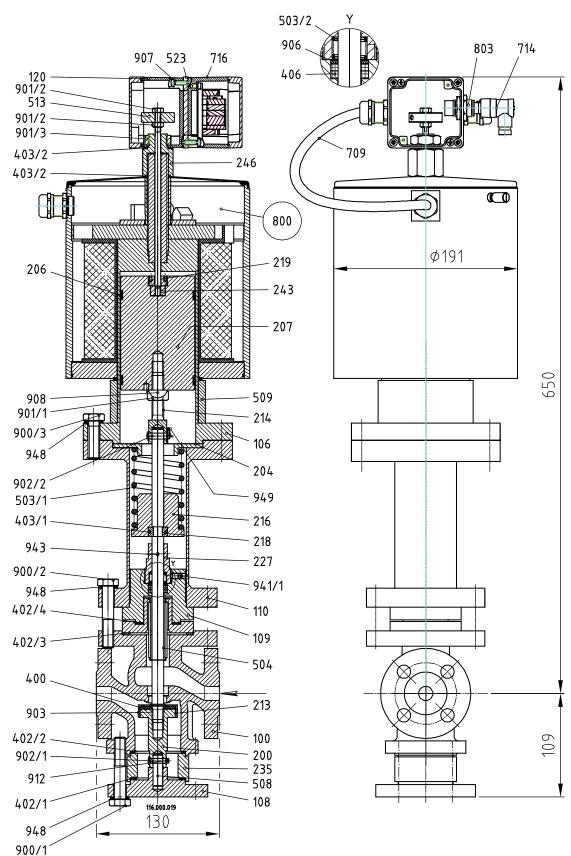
sectional drawing 40-EVF-R.. (PN 40)
